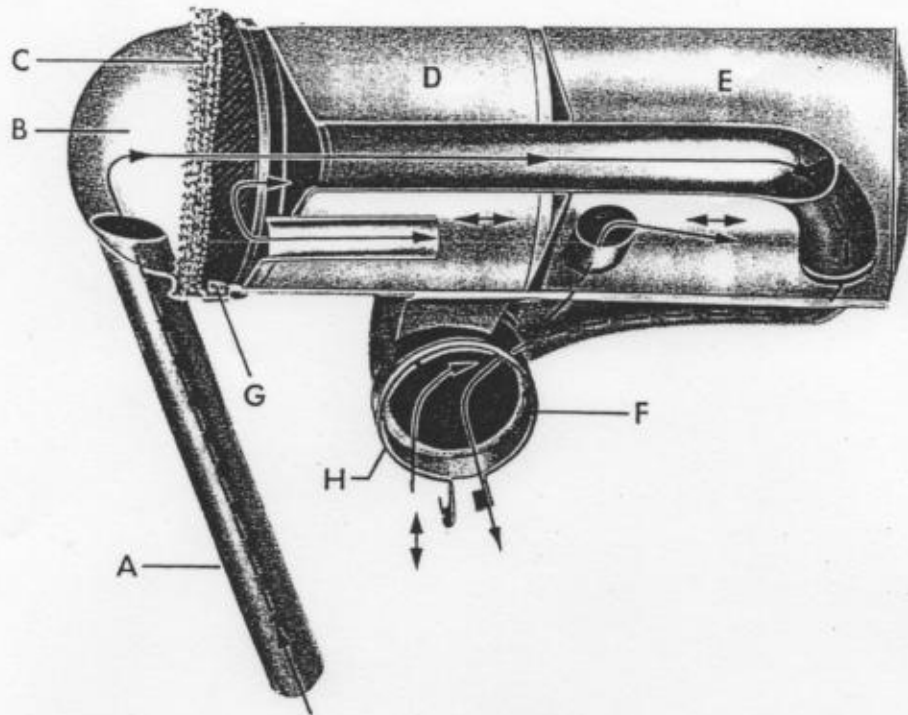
Oil-wetted Air Cleaner and Intake Silencer F 11
